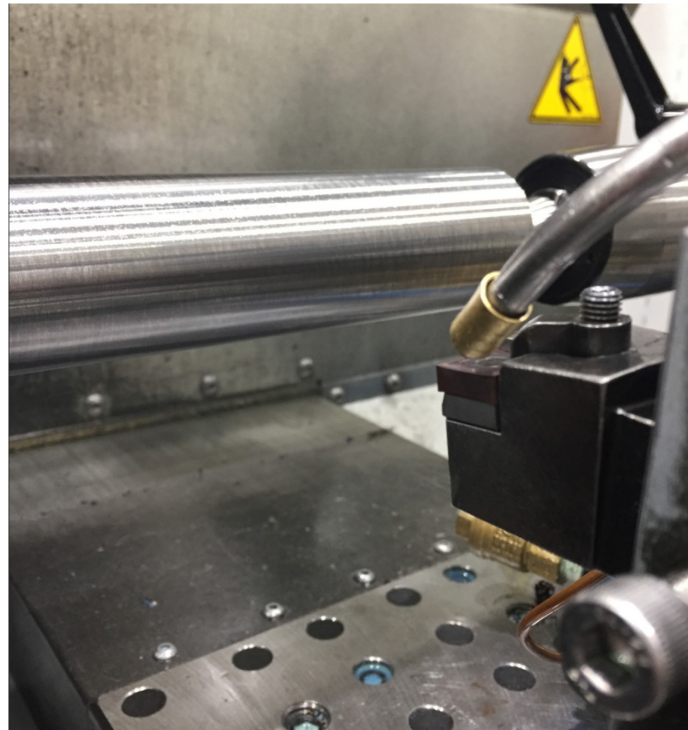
Experimental setup for MQL machining on Haas TL-2 showing the position of the MQL delivery nozzle relative to the cutting tool and workpiece. The cutting tool traverses along the axis of rotation from right to left.
